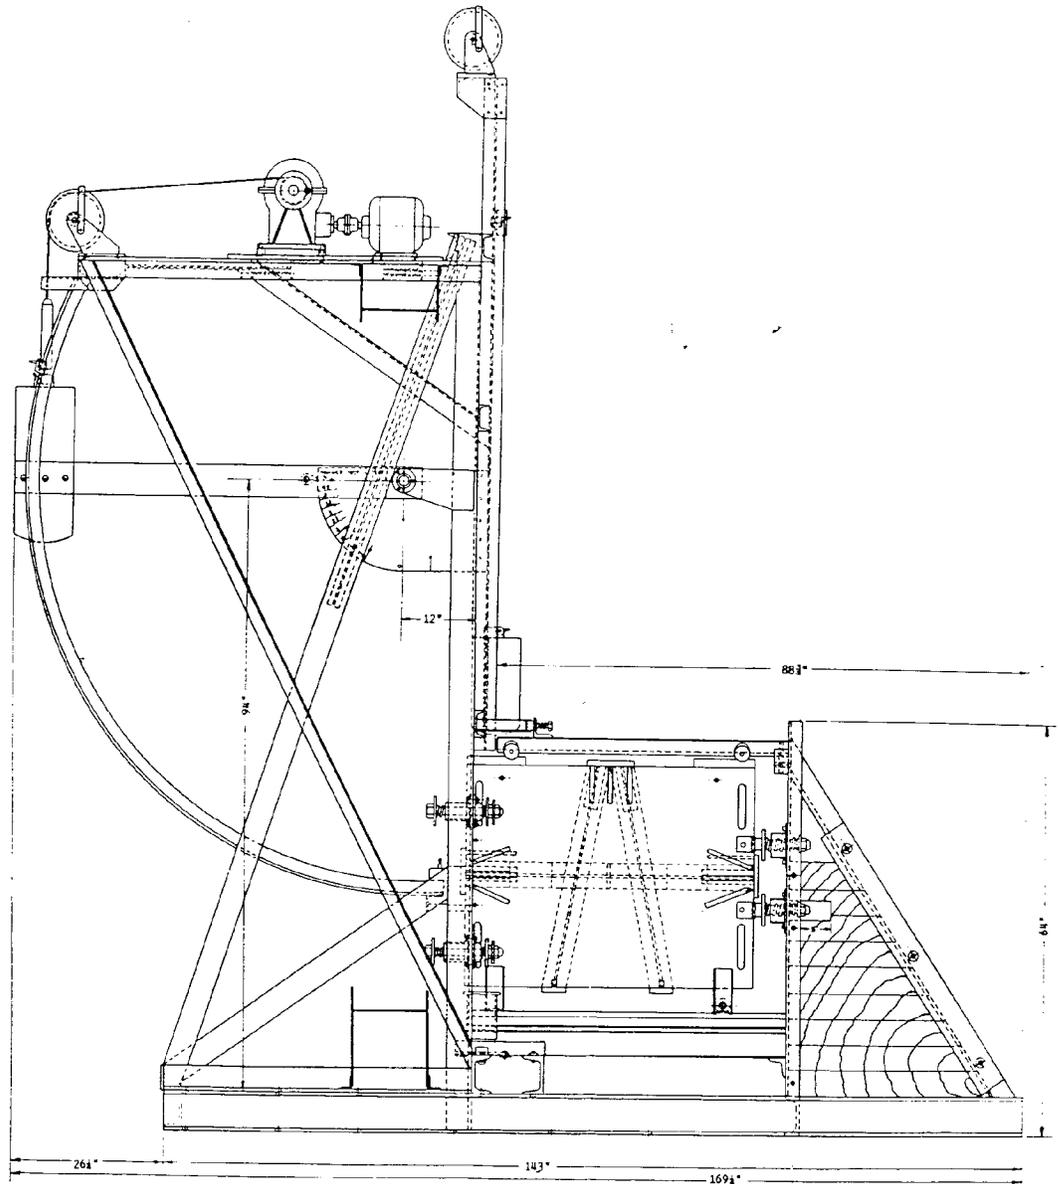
HI Shock Machine for Lightweight Equipment.
